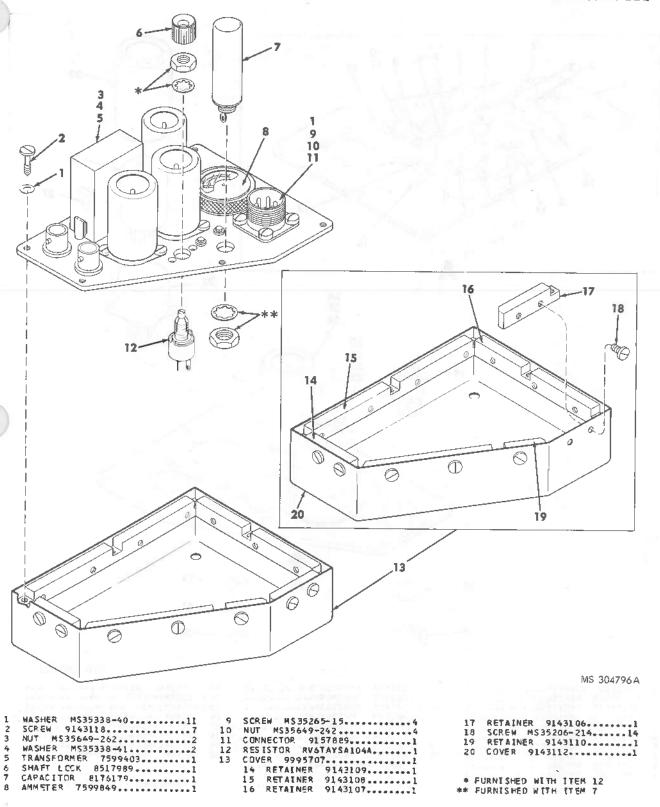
CONVERTER, WAVEFORM /9143120/-PARTIAL EXPLODED VIEW /SEE FIGURE 96 FOR NEXT HIGHER ASSEMBLY/
